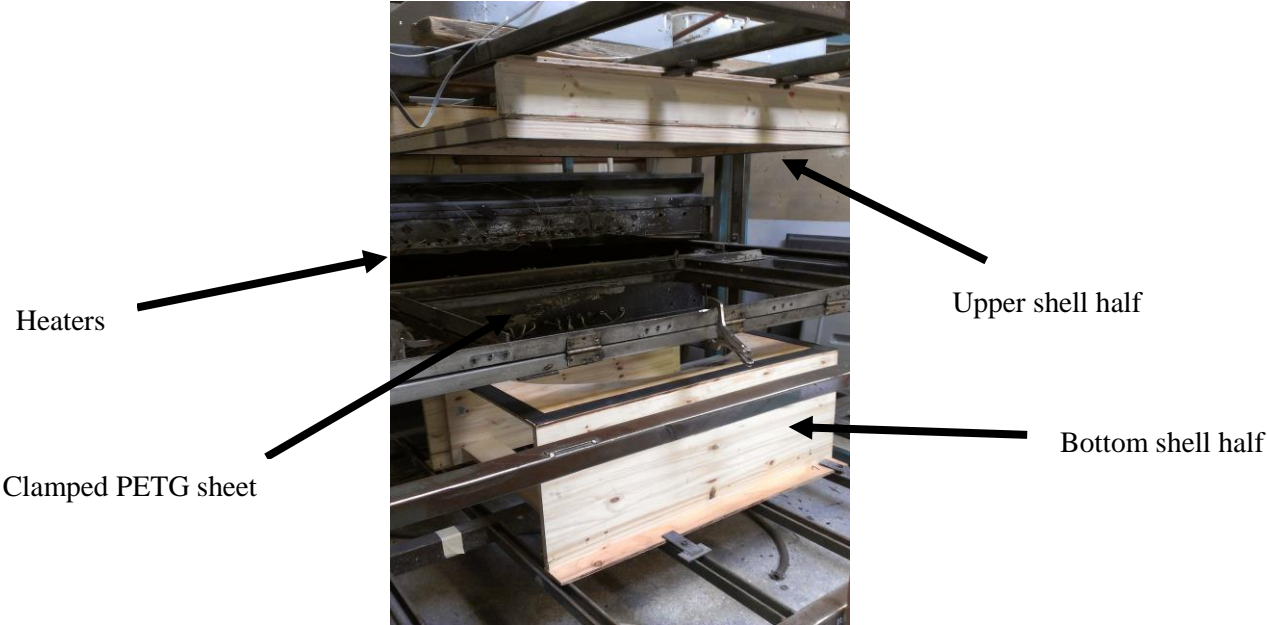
Final setup of the tooling fixture and thermoplastic in the machine
